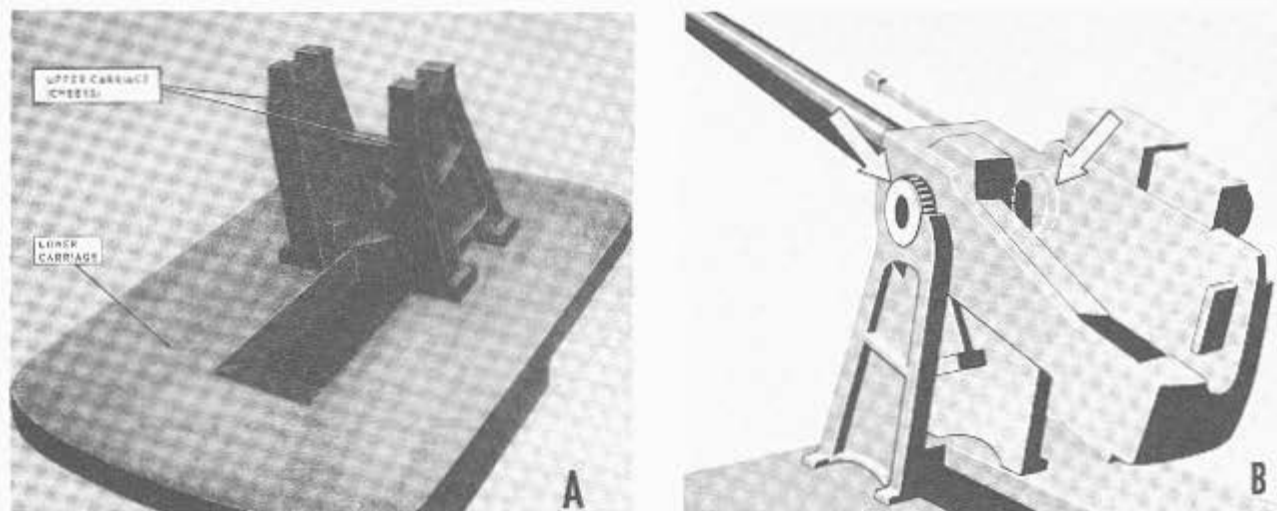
B4.—The carriage. A. Upper and lower carriage. B. Trunnion bearings.
